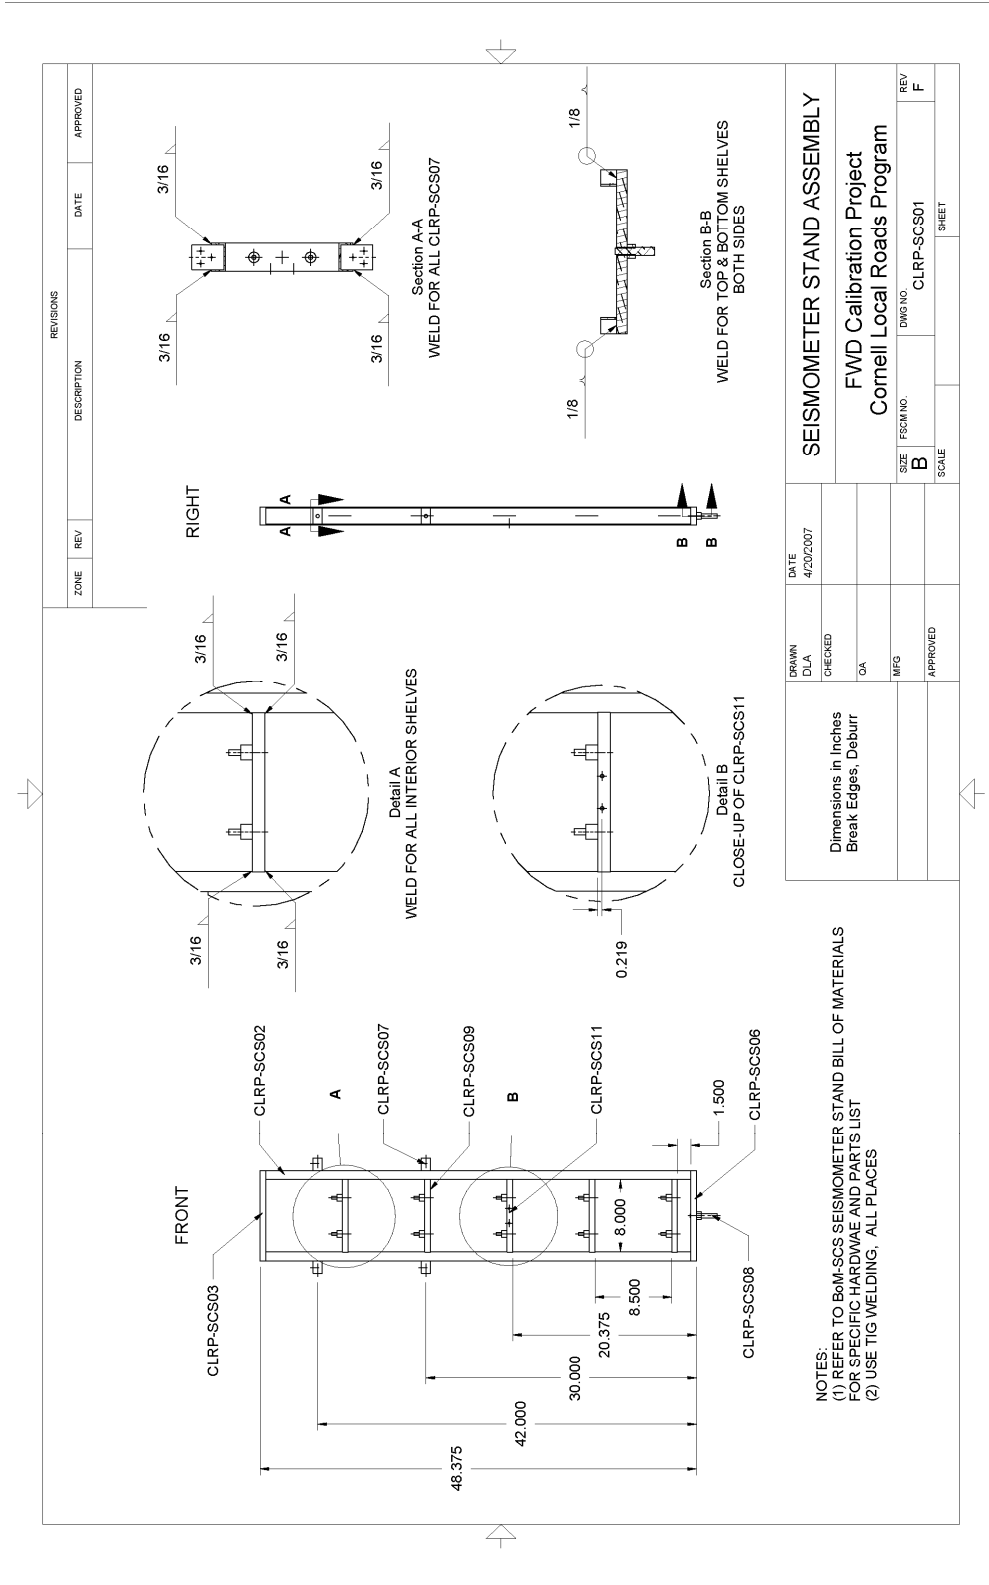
Drawing. CLRP-SCS01 Seismometer Stand Assembly.
